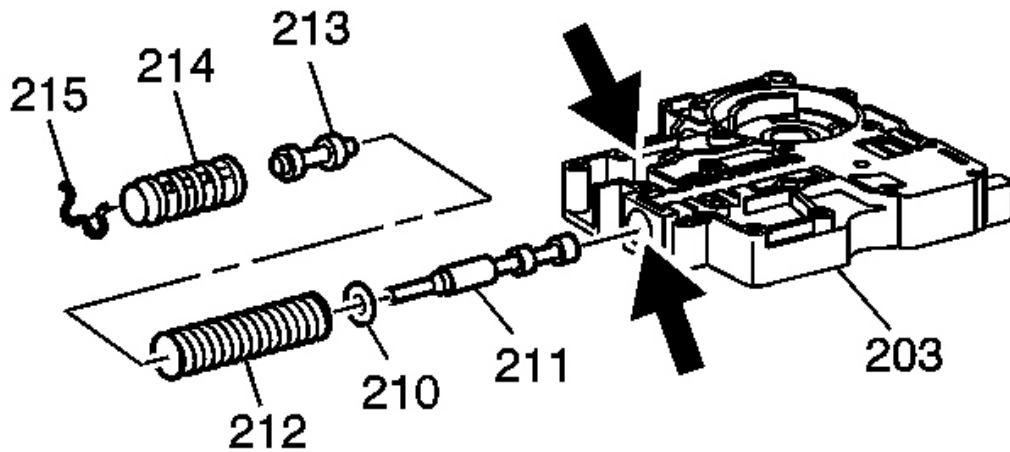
Pressure Regulator Valve Bore Inspection Areas
